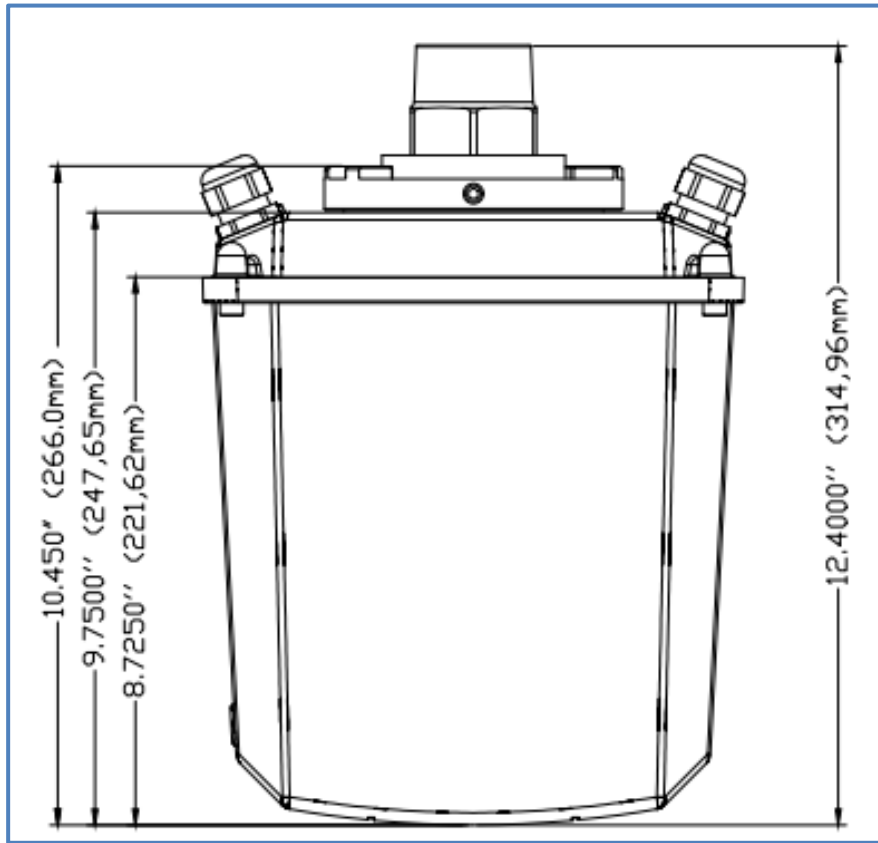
Dimensions of the Hydran M2-X Enclosure - Top View
